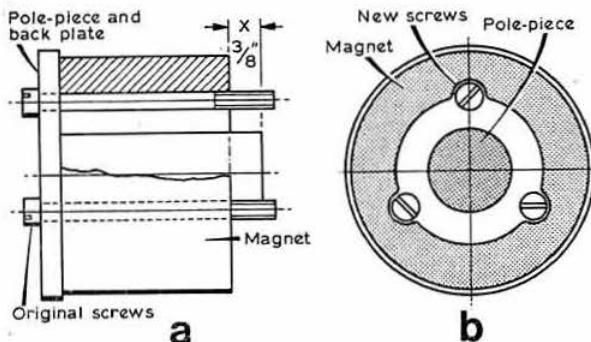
(a) Original magnet and pole piece assembly and (b) position of the new screws
